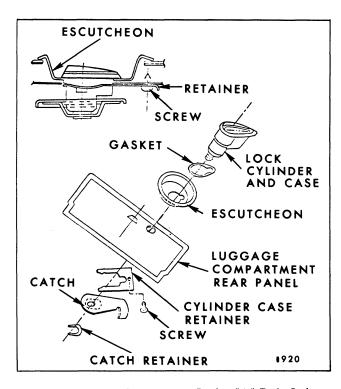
Luggage Compartment Lock - "A" Body Styles
